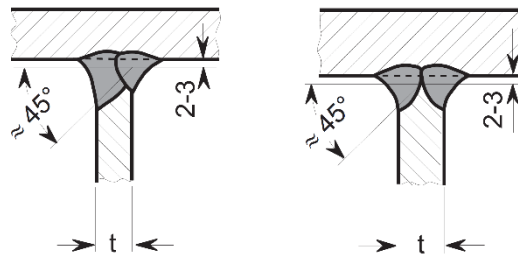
Single and double-bevel welds with full root penetration
